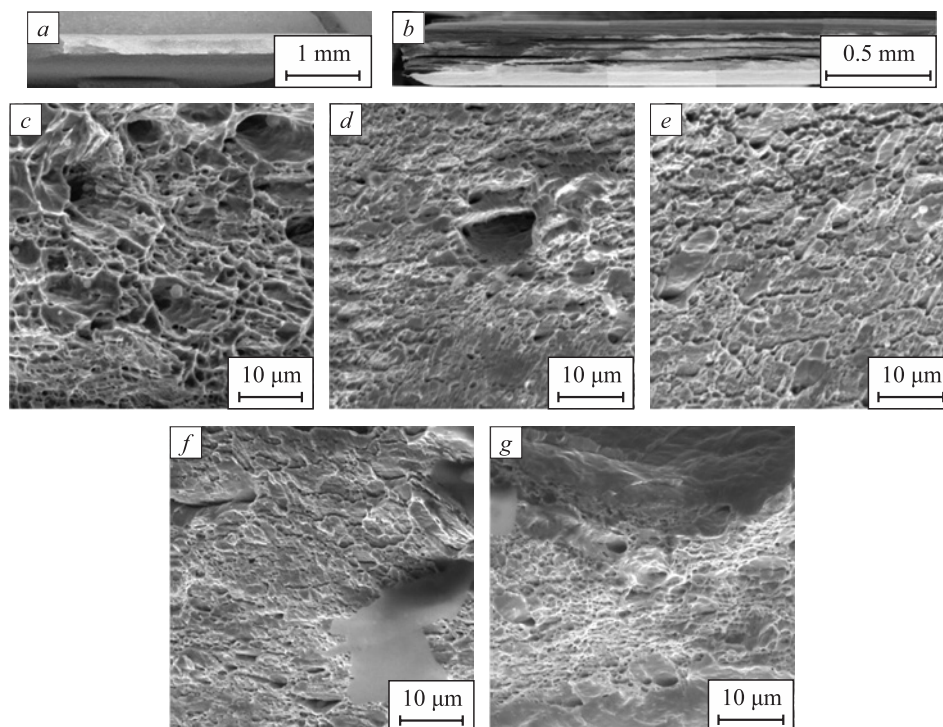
Fracture factors of 10G2FBYu steel samples:
